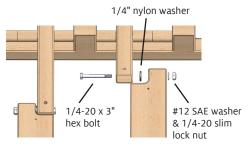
ATTACH TREADLES TO TREADLE EXTENSIONS
